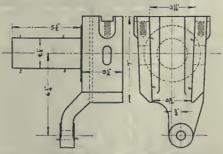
STEAM TRACTOR REVERSE SHAFT.
